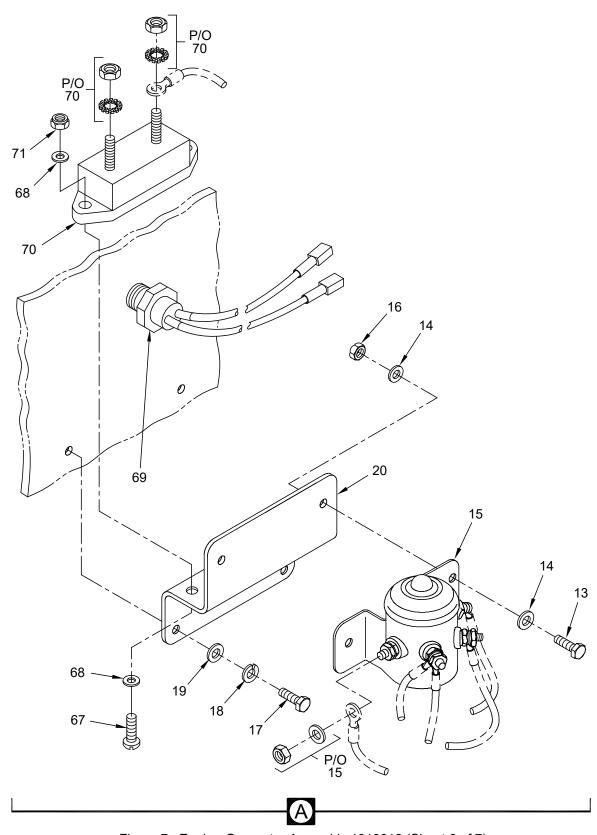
Engine-Generator Assembly 1013012 (Sheet 6 of 7).
